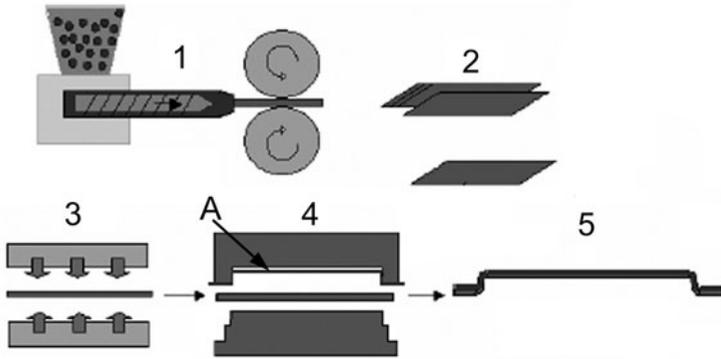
Outline of the covered door panels production. Process steps: 1 Extrusion of Polypropylene with vegetable fibres, 2 extruded sheet, 3 heating of the sheet, 4 compression moulding, 5 moulded door panel.
